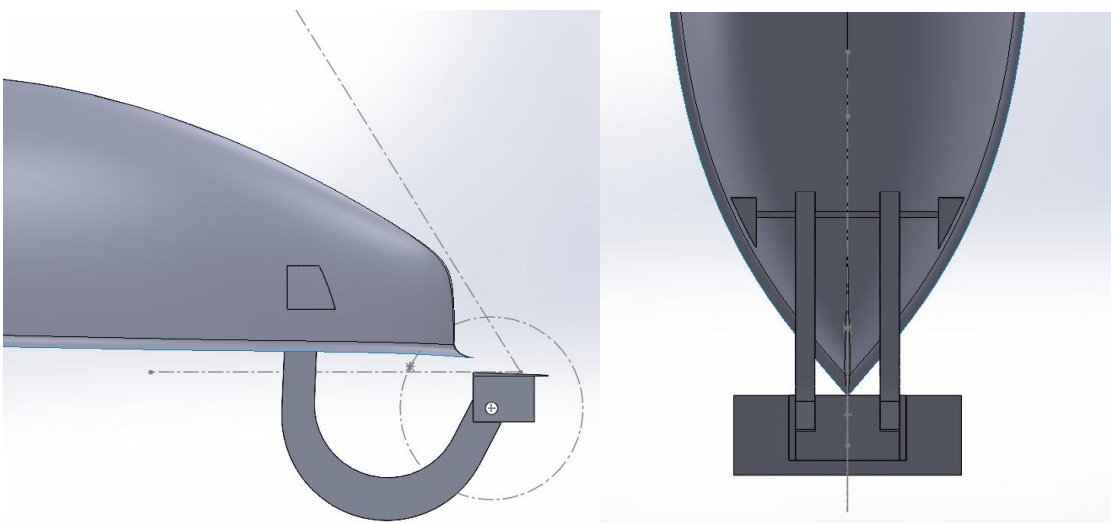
Left image shows side view of the system, right image shows the bottom view of the attachment.
